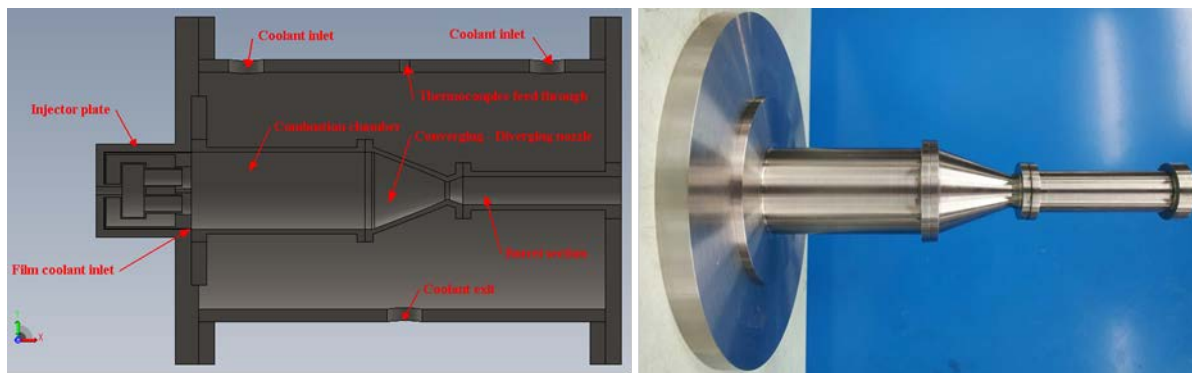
Designed vs. machined HVOF gun (Mohamed, Cabrera, Love, & Choudhuri, 2014)
